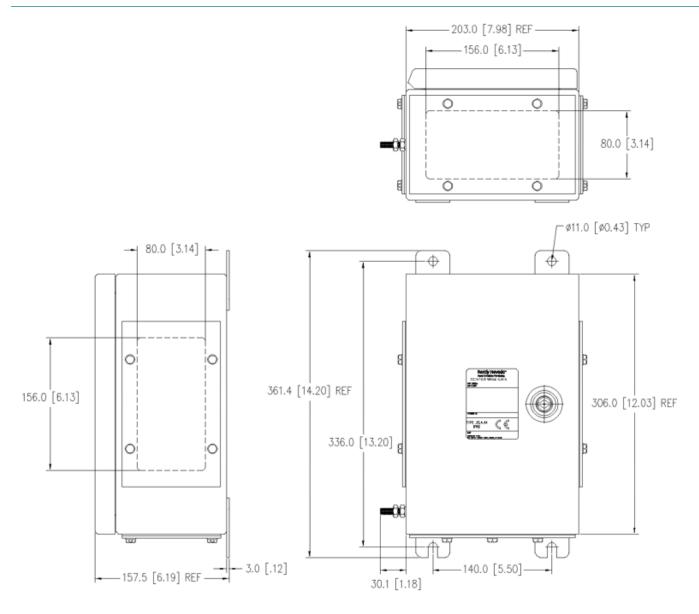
176467 3300 XL Multi-Purpose Housing Dimensions (12" x 8" x 6")
